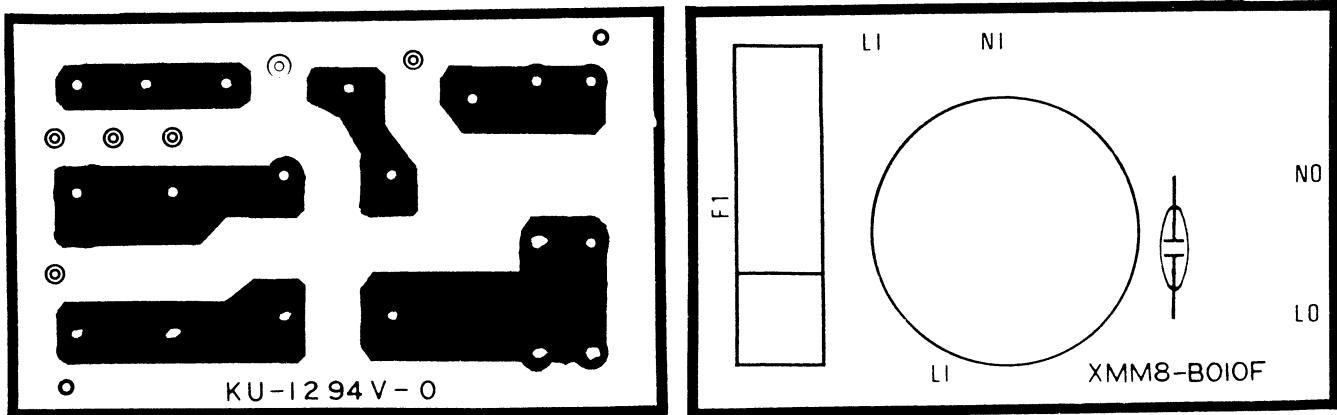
Parts Layout and Pattern Schematic for Filter P.C. Board
